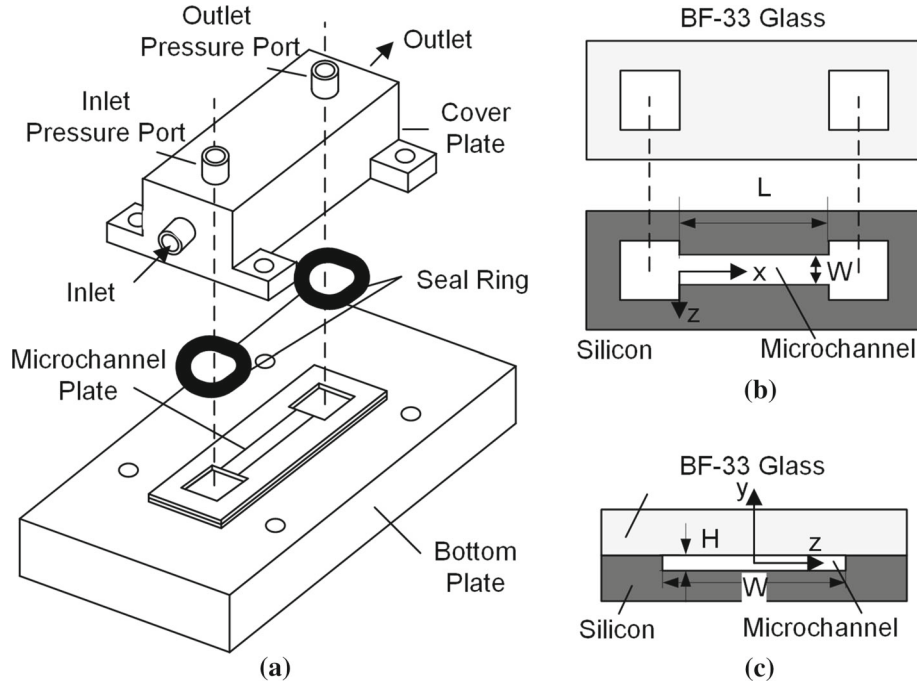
Schematics of the test module: a exploded view of the test module; b exploded view of the microchannel plate; c cross section of the microchannel plate
